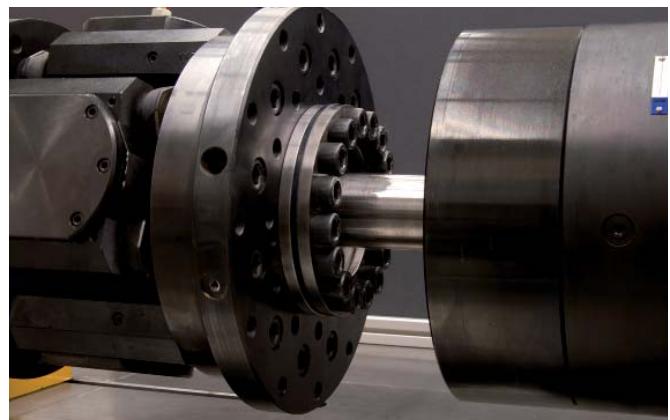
Test component, clamp flange and cardan joint of the test system during a torsion experiment
